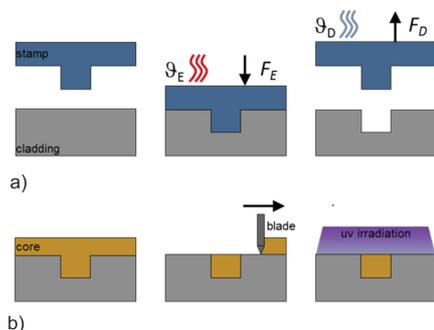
Waveguide fabrication through hot embossing: a) embossing trench structures into thermoplastic substrate; b) filling, doctor blading and UV-curing of core.
